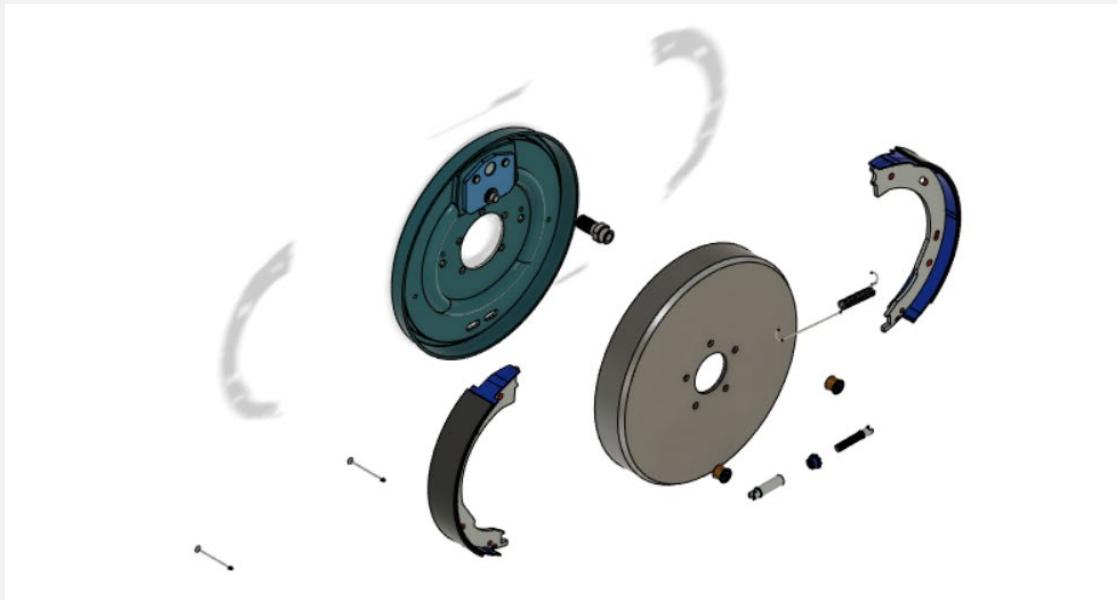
EXPLODED VIEW OF DRUM BRAKE
